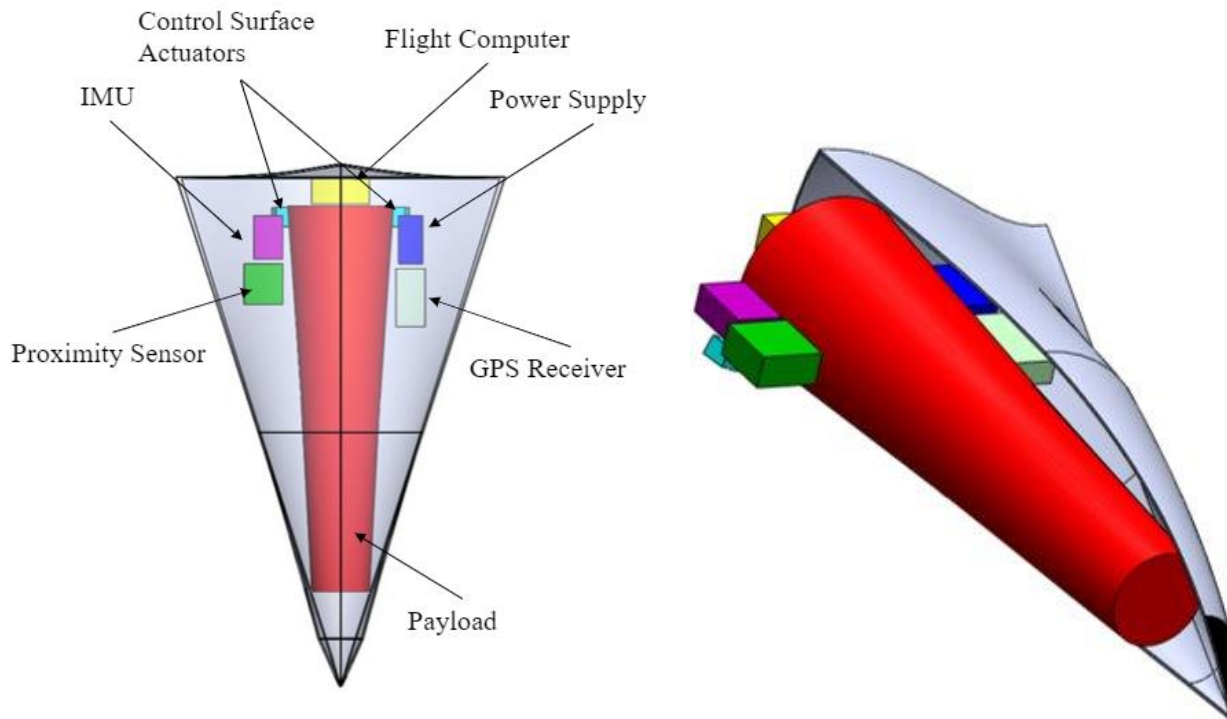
Cross Section and Labeled View of Glide RV Internal Layout
